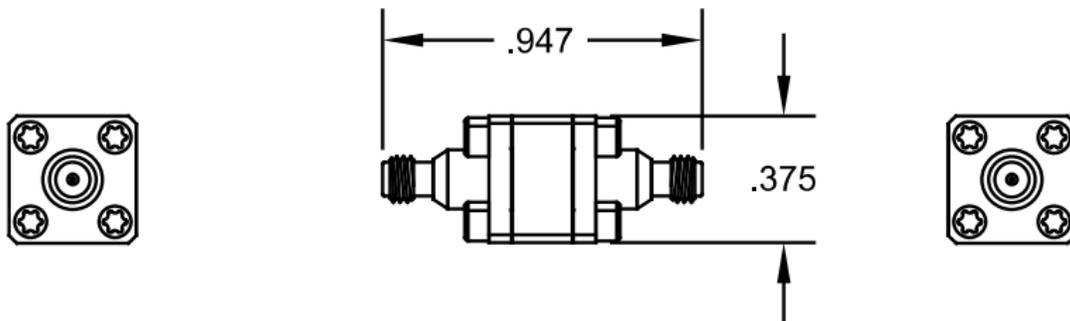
HL8838 Mechanical Drawing (dimensions in inches)
